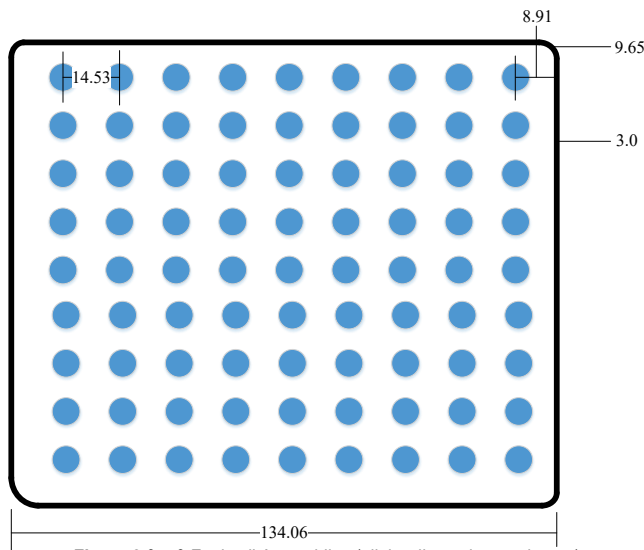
9×9 Fuel cell Assemblies (all the dimension are in mm)
